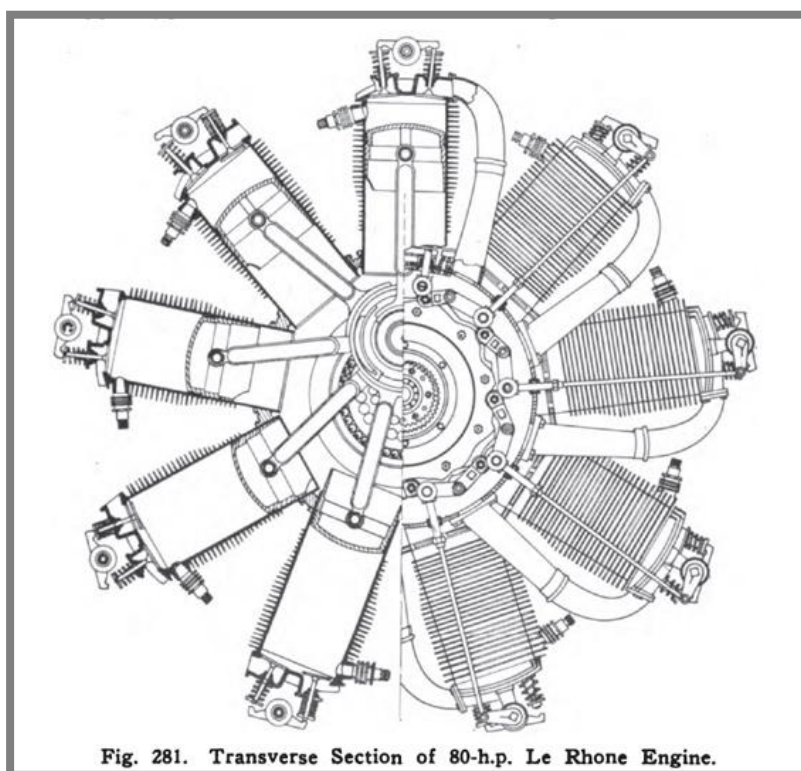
Transverse Section of 80-h.p. Le Rhone Engine.
